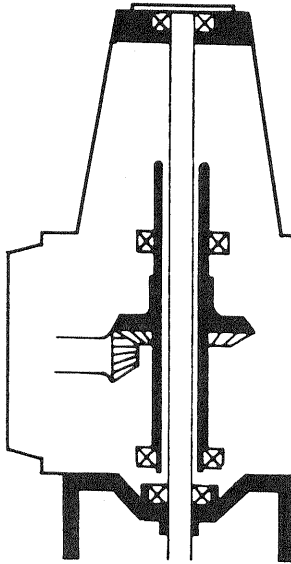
A Hollow quill design showing independent bearing supports for quill shaft & mixer shaft
